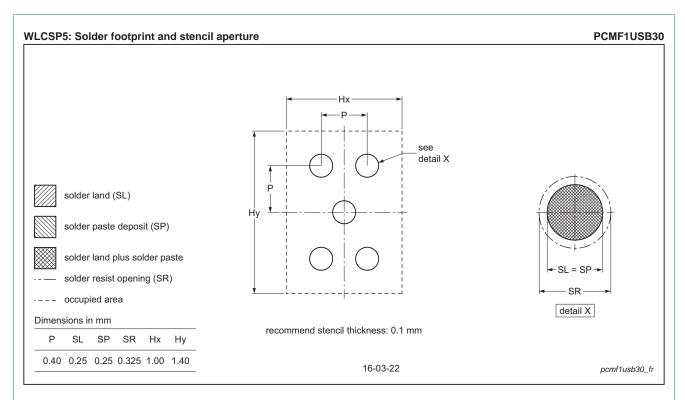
Soldering footprint WLCSP5 (PCMF1USB30)
